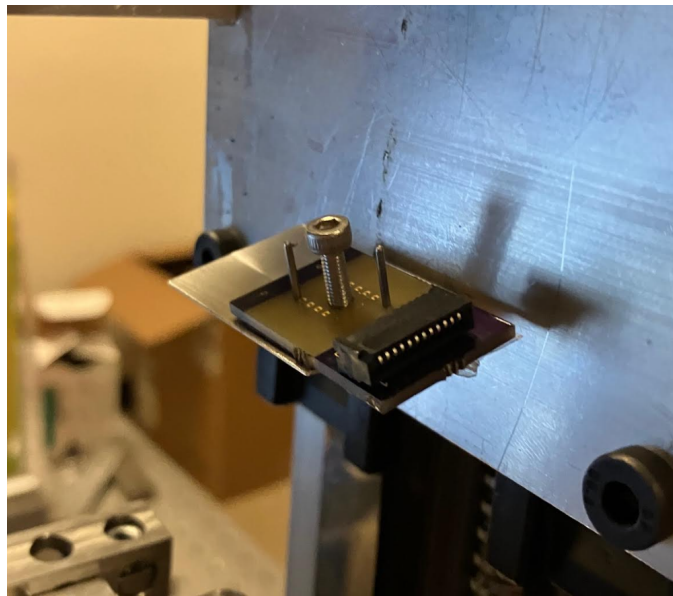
Machined Angled Piece to Hold the AFM Chip and Associated Circuit Board.
